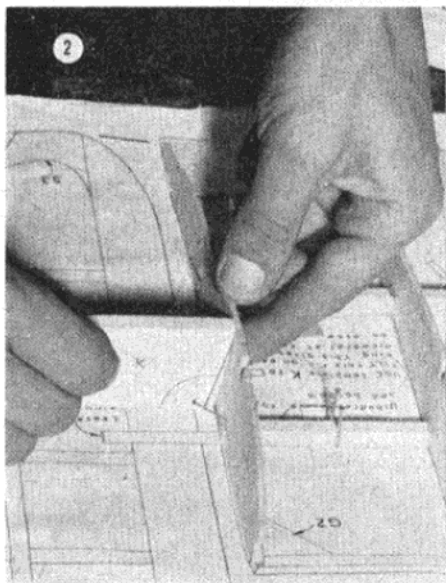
indicates the correct method of setting the root rib angle using checking piece "K."
